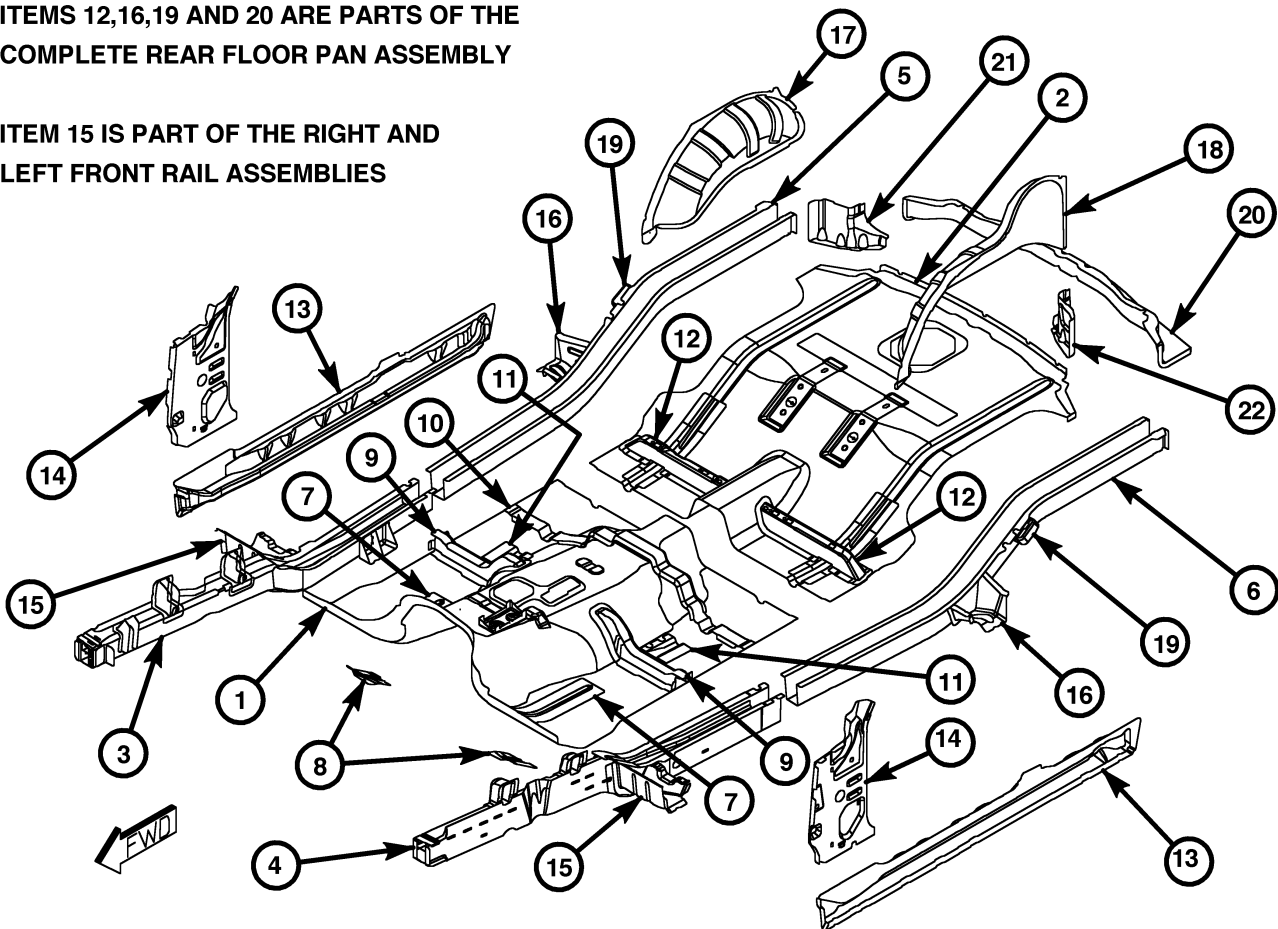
FULL FLOOR PAN ASSEMBLIES
